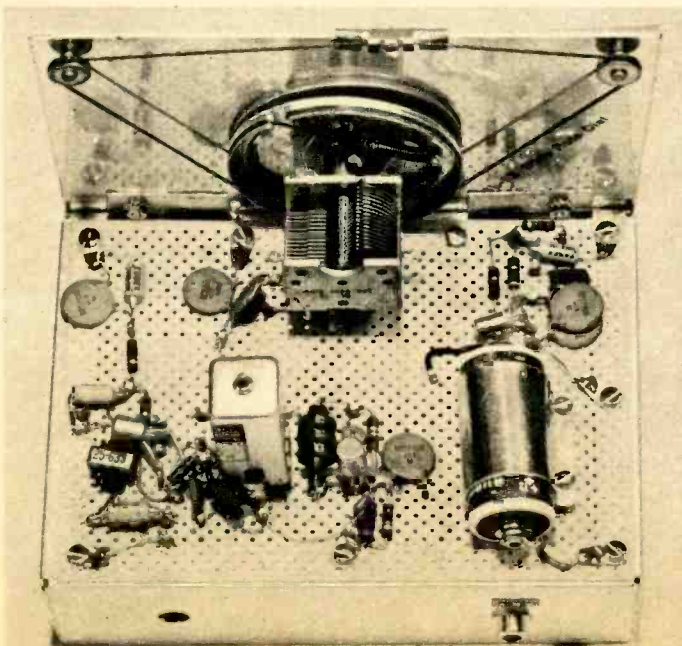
Top view of receiver. First thing to do is cut out top of chassis, leaving a lip the same size as in bottom of chassis. Dial assembly is same width as chassis and is attached to chassis by bending up two 1½-in.-wide tabs cut out of lip at front. Mount the parts on the board after installing the board on the chassis.
